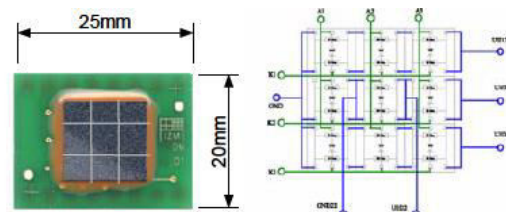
Thermal test chip assembly and electrical interconnection schematic
